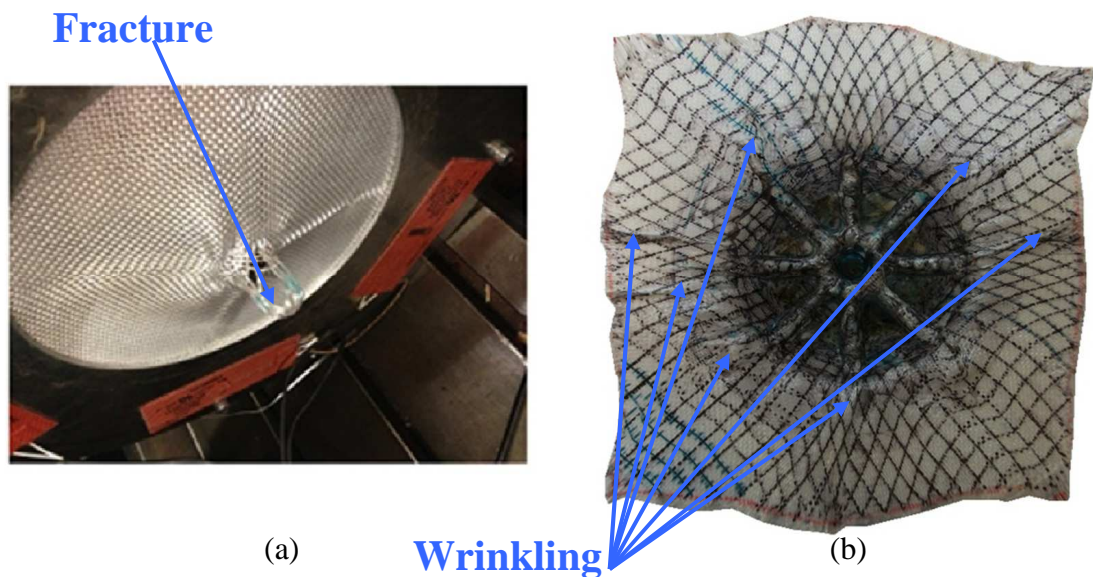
(a) Tearing of blank due to excessive blank holder force (b) wrinkling due to insufficient blank-holder force
